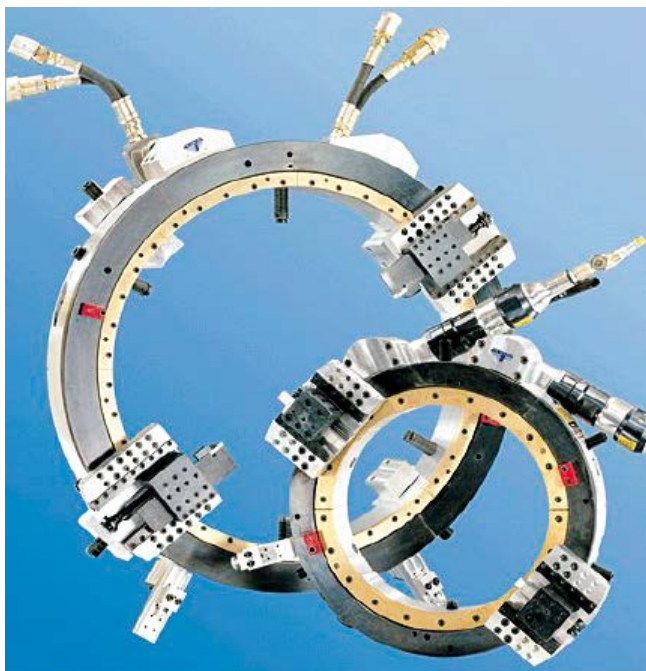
Manufacturers Photograph of Clam Shell Cutters.
